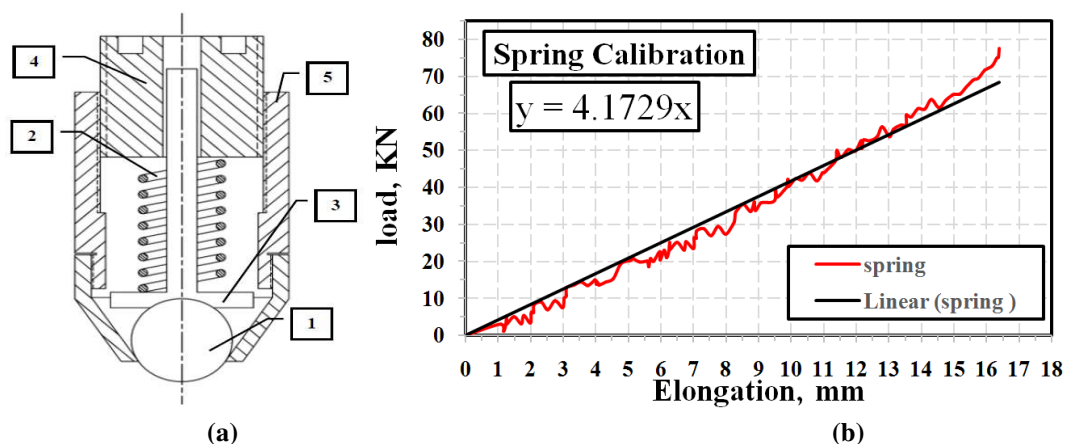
(a) Schematic Representation for Burnishing Housing. (1) Ball 27 mm Diameter (2) Spring (3) Adapter (4) Lock Nut (5) Burnishing Tool Housing. (b) Spring Calibration Curve.
